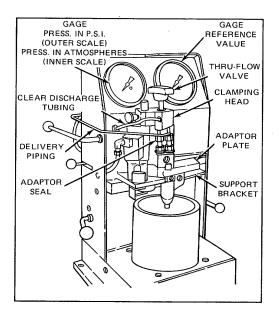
Injector Installed in Tester J23010 with Clamping Head
